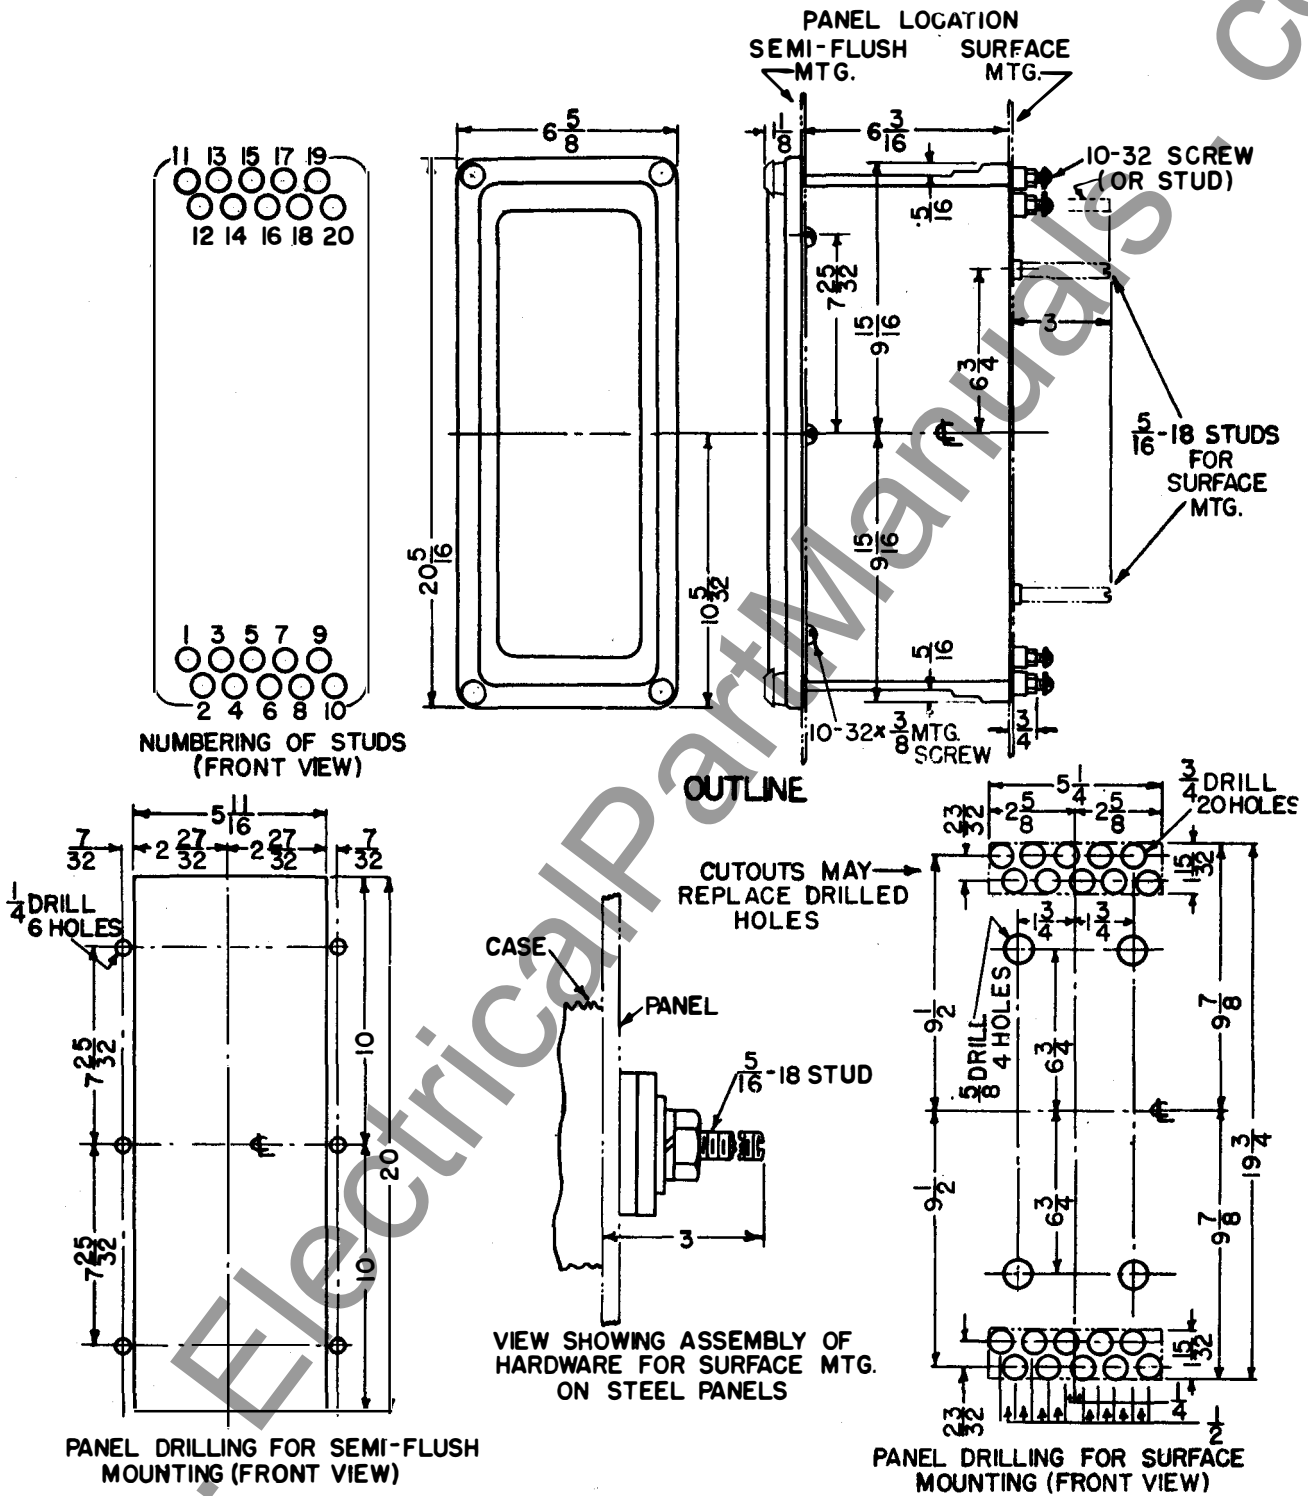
Outline and Panel Drilling Dimensions for Type IJD52B and IJD53D Relays
